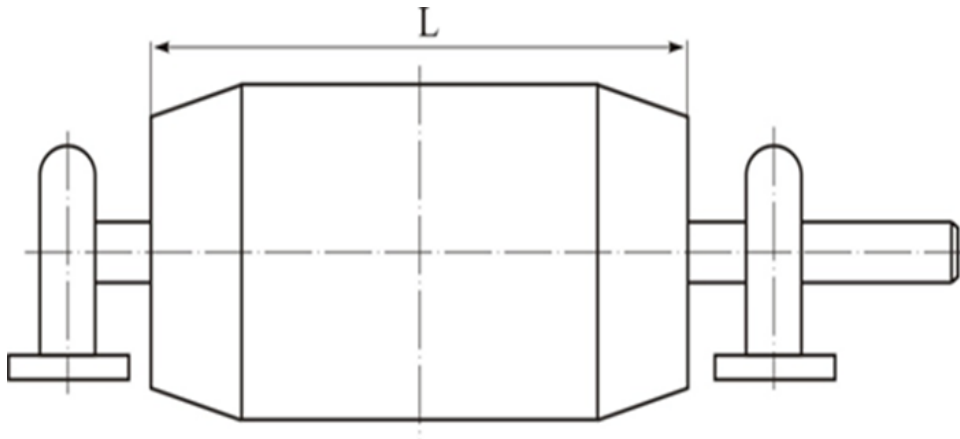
Typical design of a cylindrical-conical drum of a belt conveyor
